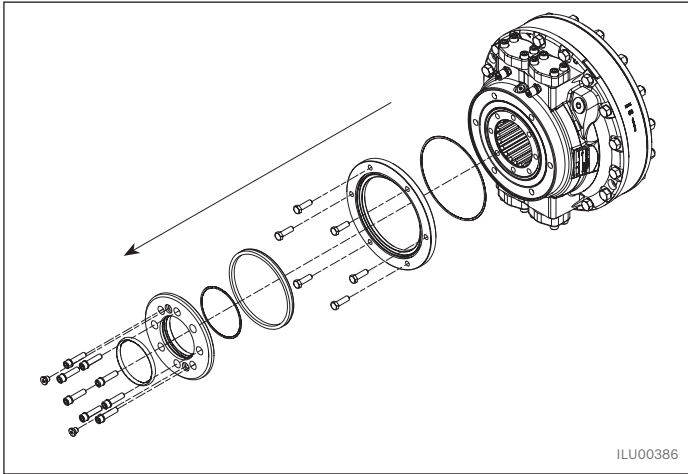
Dismounting of Hägglunds CA and CBp 140 with through hole
